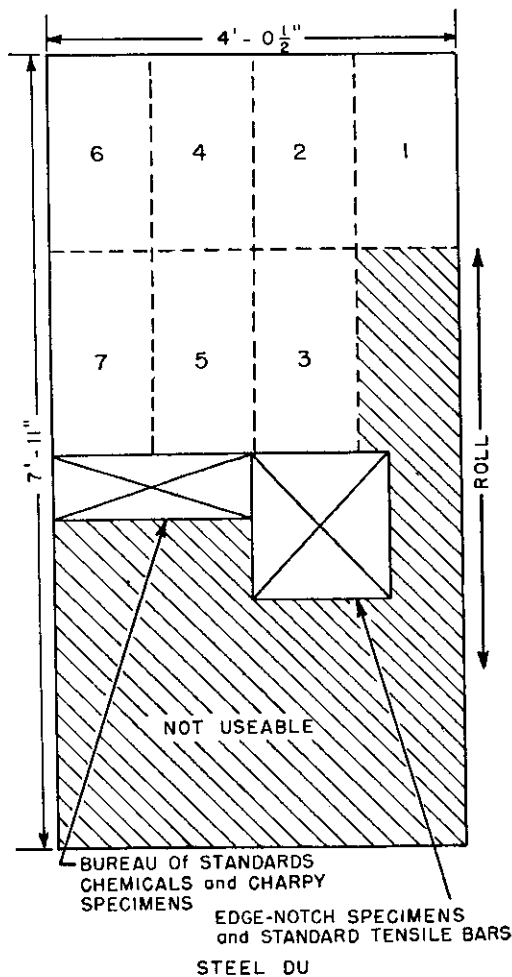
Pierre S. Dupont—Sample from deck plate C-10 showing location of test specimens
